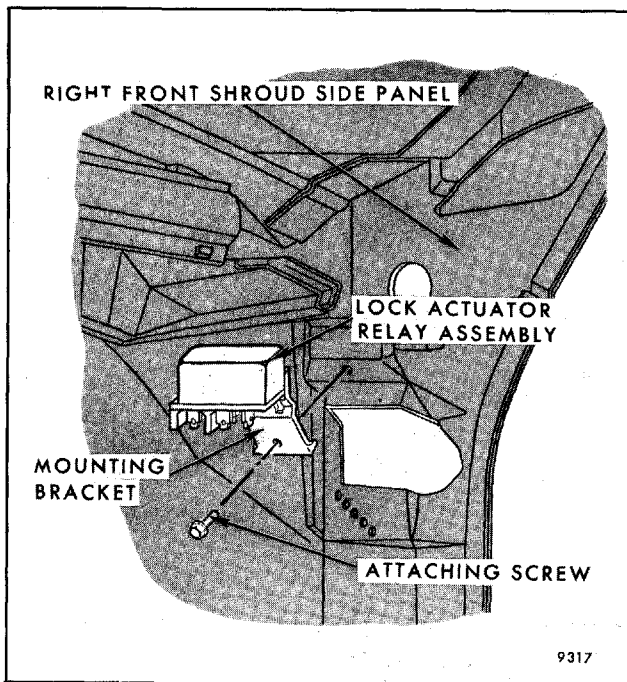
Permanent Magnet Motor Lock Actuator Relay
